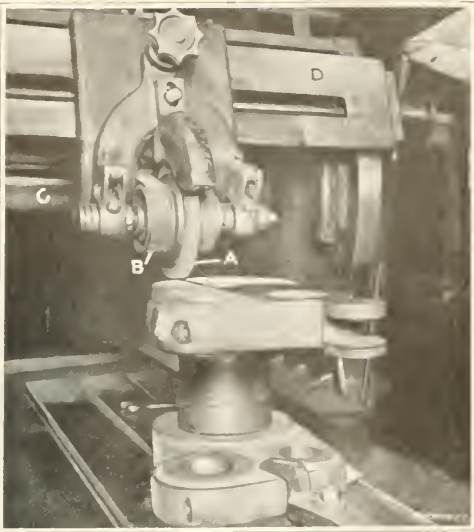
Grinding a Milling Machine Wrist on a No. 4 Brown & Sharpe Surface Grinding Machine
